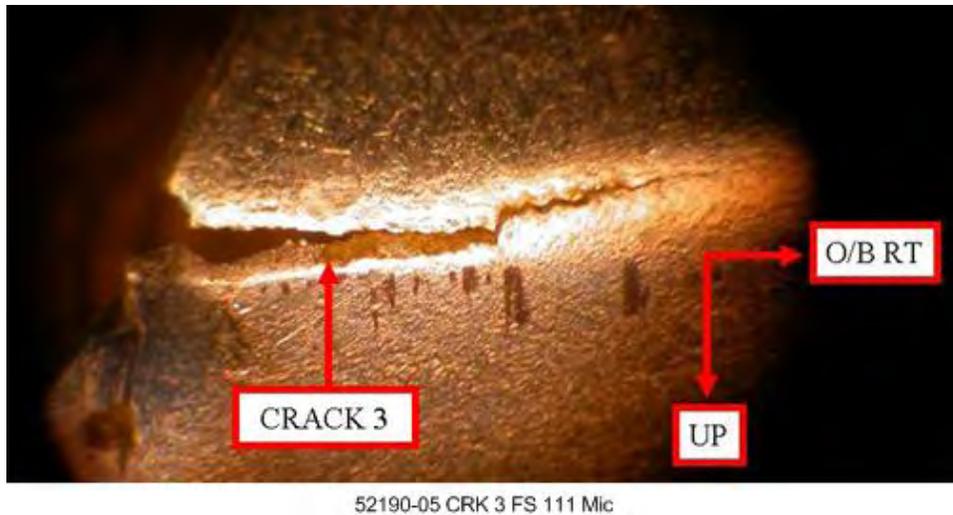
Microscopic View of Crack 3 on the Bulkhead Assembly Lower Forward Left Frame FS 111
